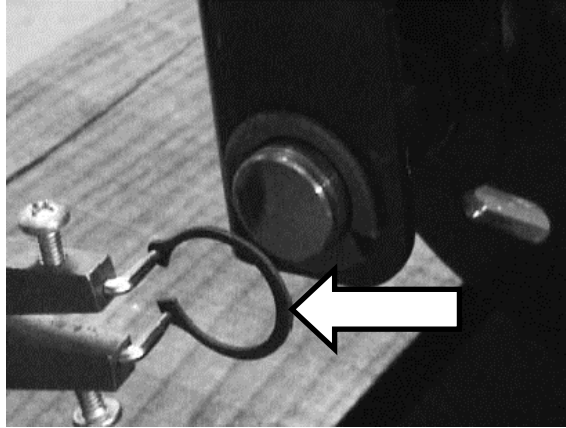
Lower Knuckle Link Arm Snap Ring, Bottom
